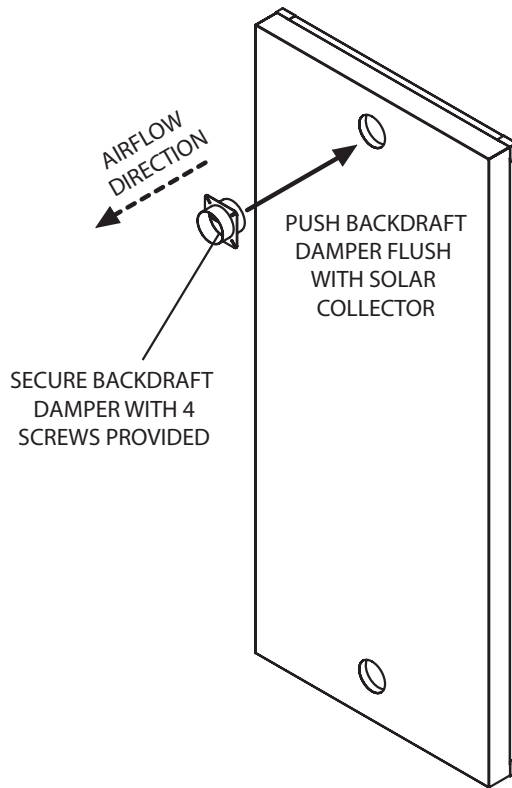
Installing the backdraft damper on the outlet of the solar collector.
